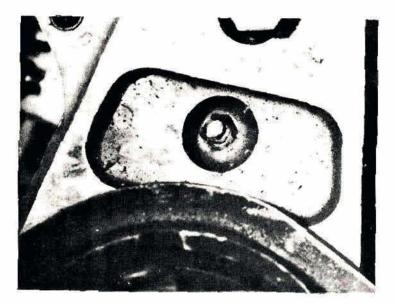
Close-up view before disassembly of bushing against which head of bolt should have been.
